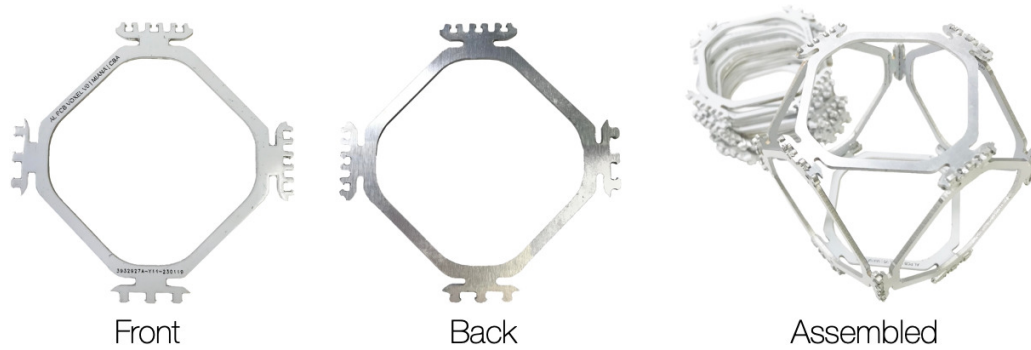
Aluminum PCB voxel. (From left) Top surface of aluminum PCB with solder mask and silkscreen. Bottom surface. Assembled voxel.
